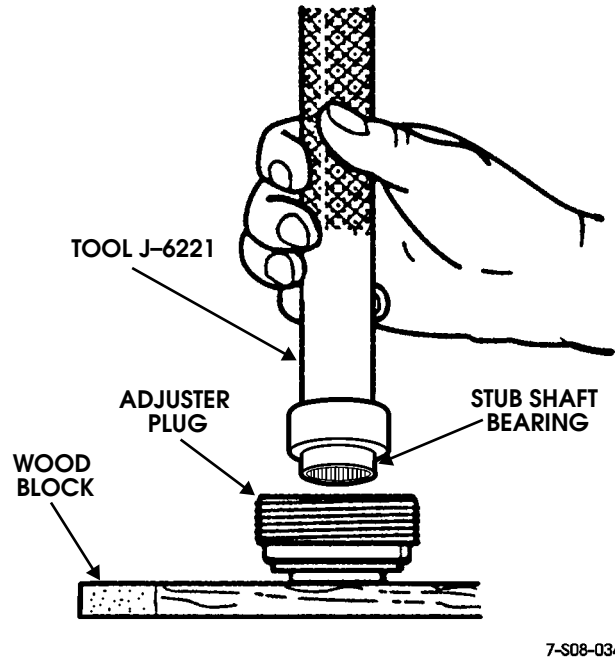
Installing Stub Shaft Bearing and Seals In Adjuster Plug
